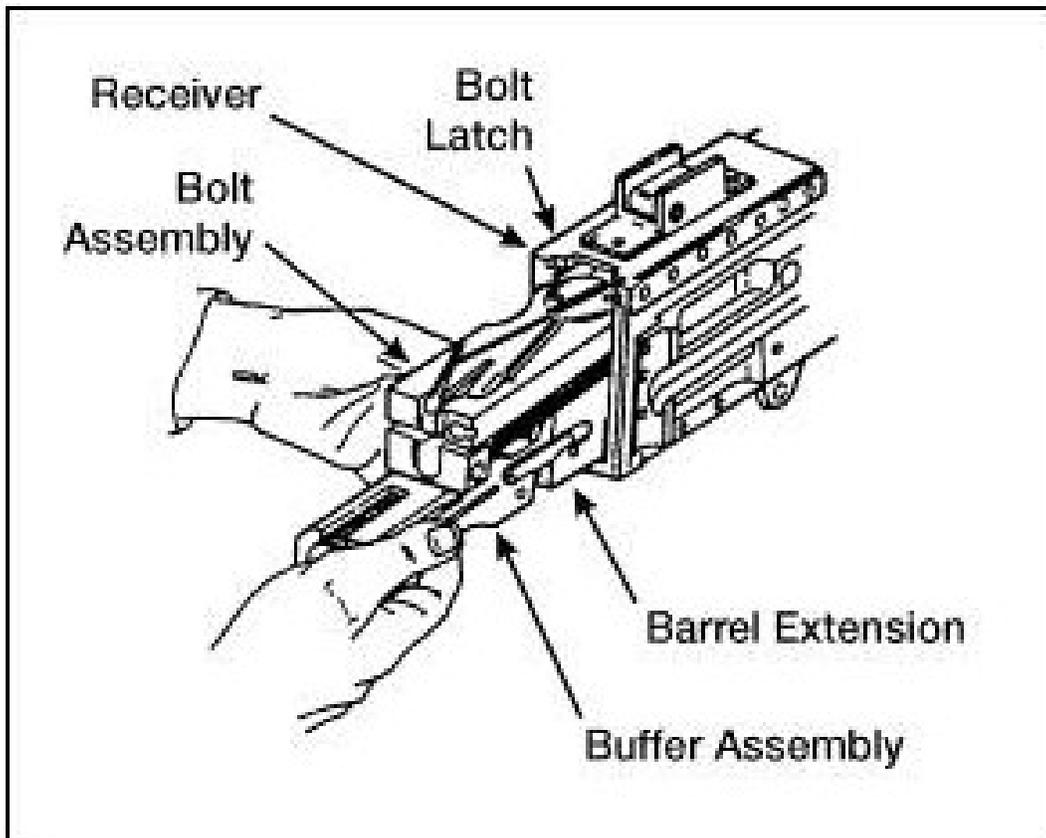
ST-1025_39 (Installation of the bolt assembly within the barrel extension and buffer assembly)
